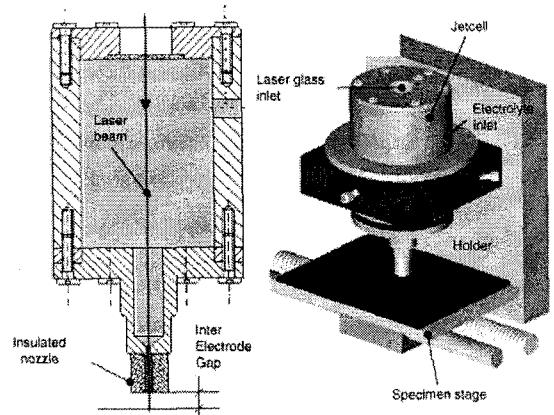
LAJECM apparatus systems: Jetcell cross-section (left), Machining chamber with specimen stage (right)
